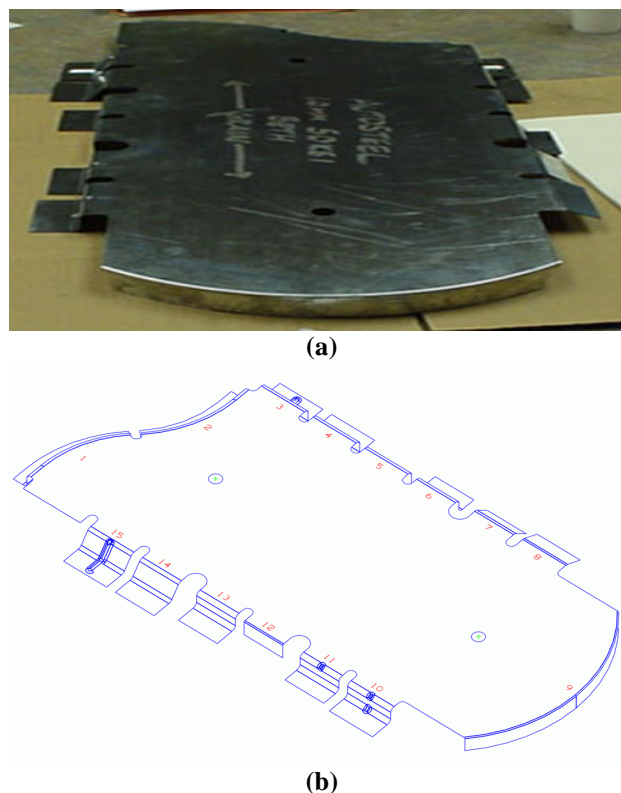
Experimental part design (a) with 15 different weld flange conditions (b).
